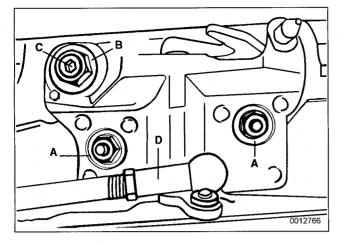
Manually operated front latch. Loosen mounting nuts (A) and locknut (B), then adjust latch height with hex-bolt (C). (Fully automatic front latch height adjuster is similar.) Latch tension is adjusted at rod ball-joint end (D).
